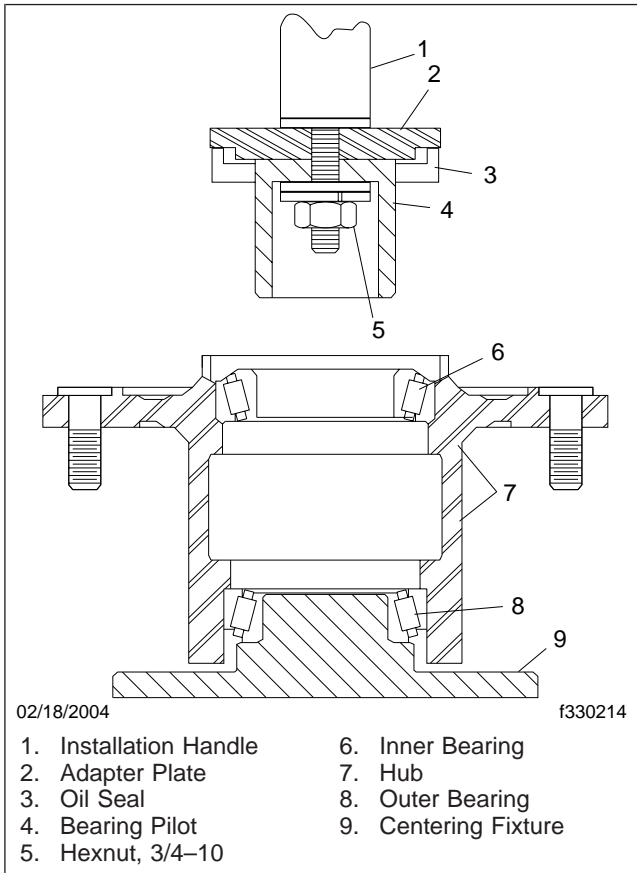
, Installing the Oil Seal Into the Hub (cross-sectional view)
